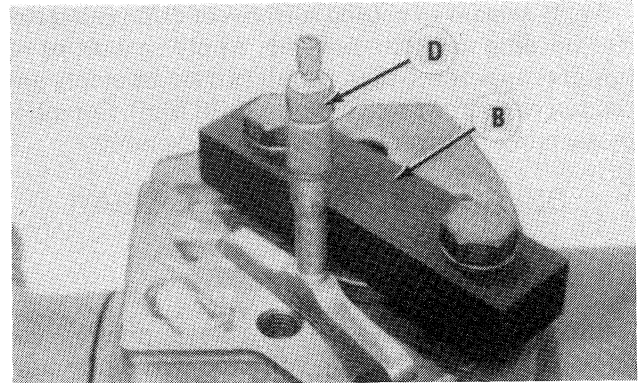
To adjust king pin balls, assembly knuckle-spindle and king pin yoke without shims and install a flat retaining bar (B) in place of steering arm. Measure distance from steering arm mounting surface to top of ball insert with depth micrometer (D) or vernier scale to determine required thickness of shims.
